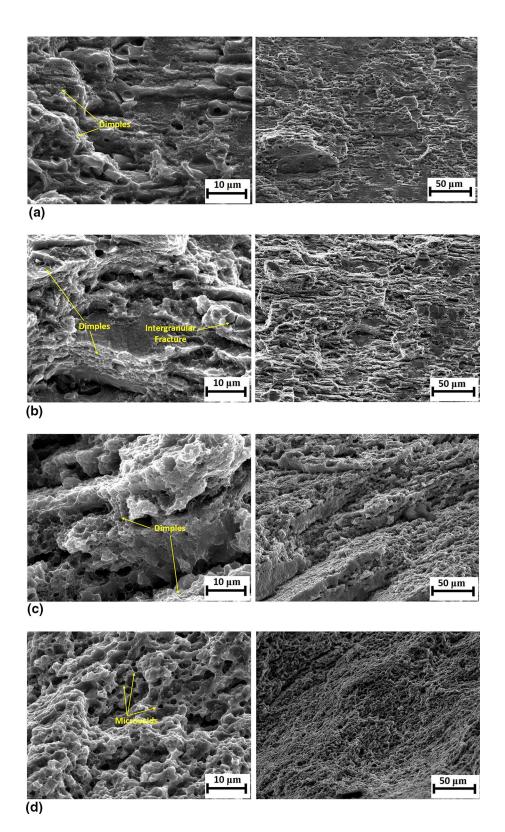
Tensile fracture surfaces of (a) base metal (7075-T6 aluminum alloy), and (b) FSWed, (c) STACAA and (d) STWQAA aluminum 7075 alloy tested with a crosshead speed of 0.8 mm/min (The pictures on the left and right show high and low magnification, respectively)
